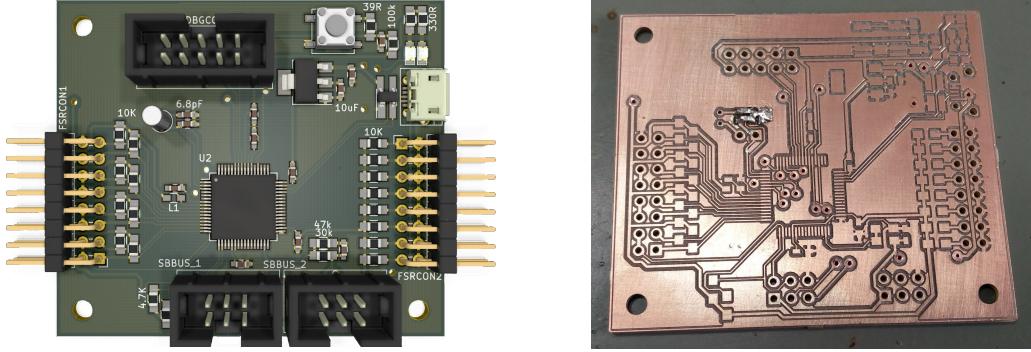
3D view and prototype of printed circuitboard developed for the project.
